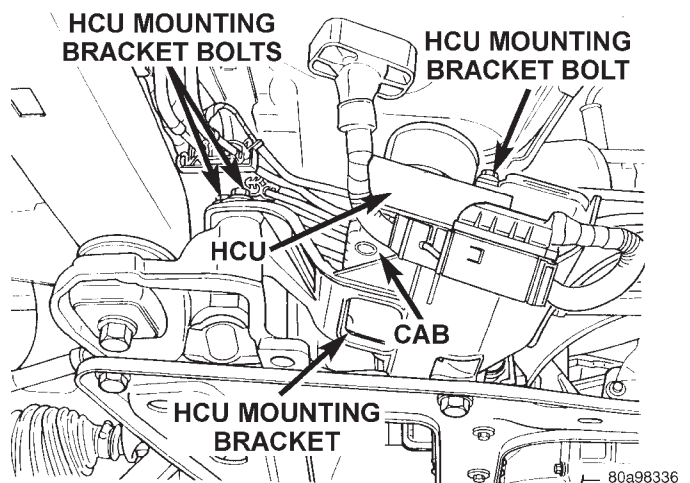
HCU To Suspension Cradle Mounting Bolts
